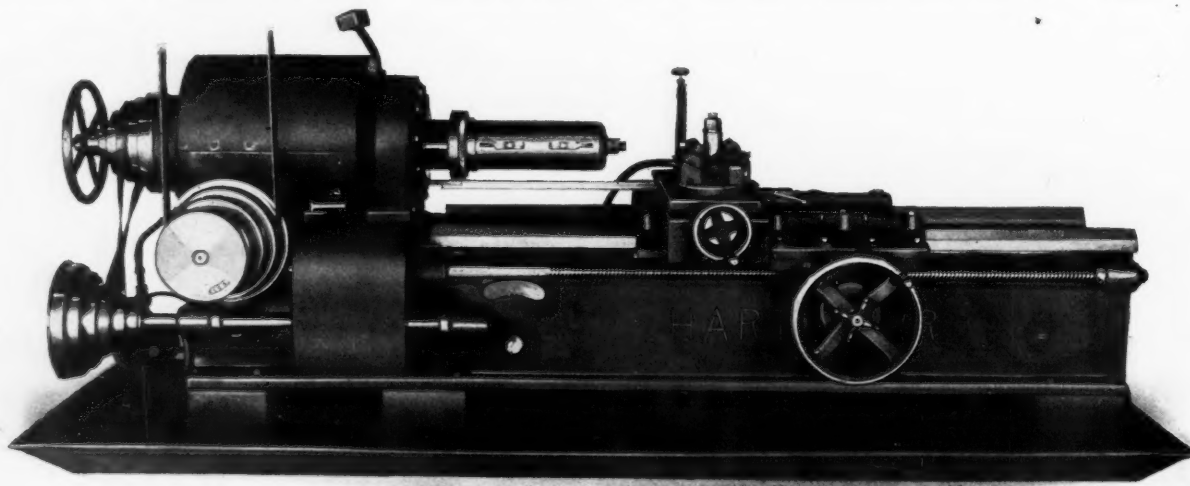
Front View of Hart-Parr Shell Turning Lathe; note Mandrel carried by Spindle
